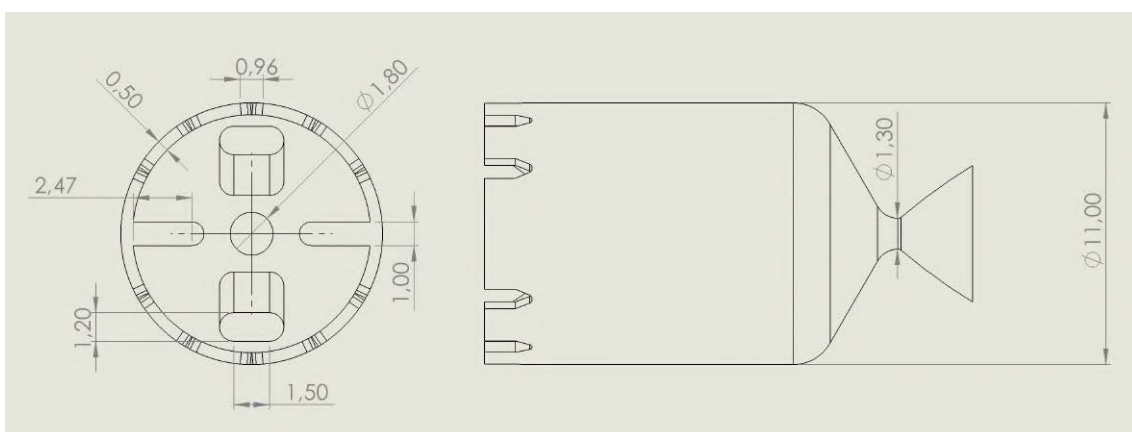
Coaxial configuration C2.17: dimensions and details of the injector plate.
